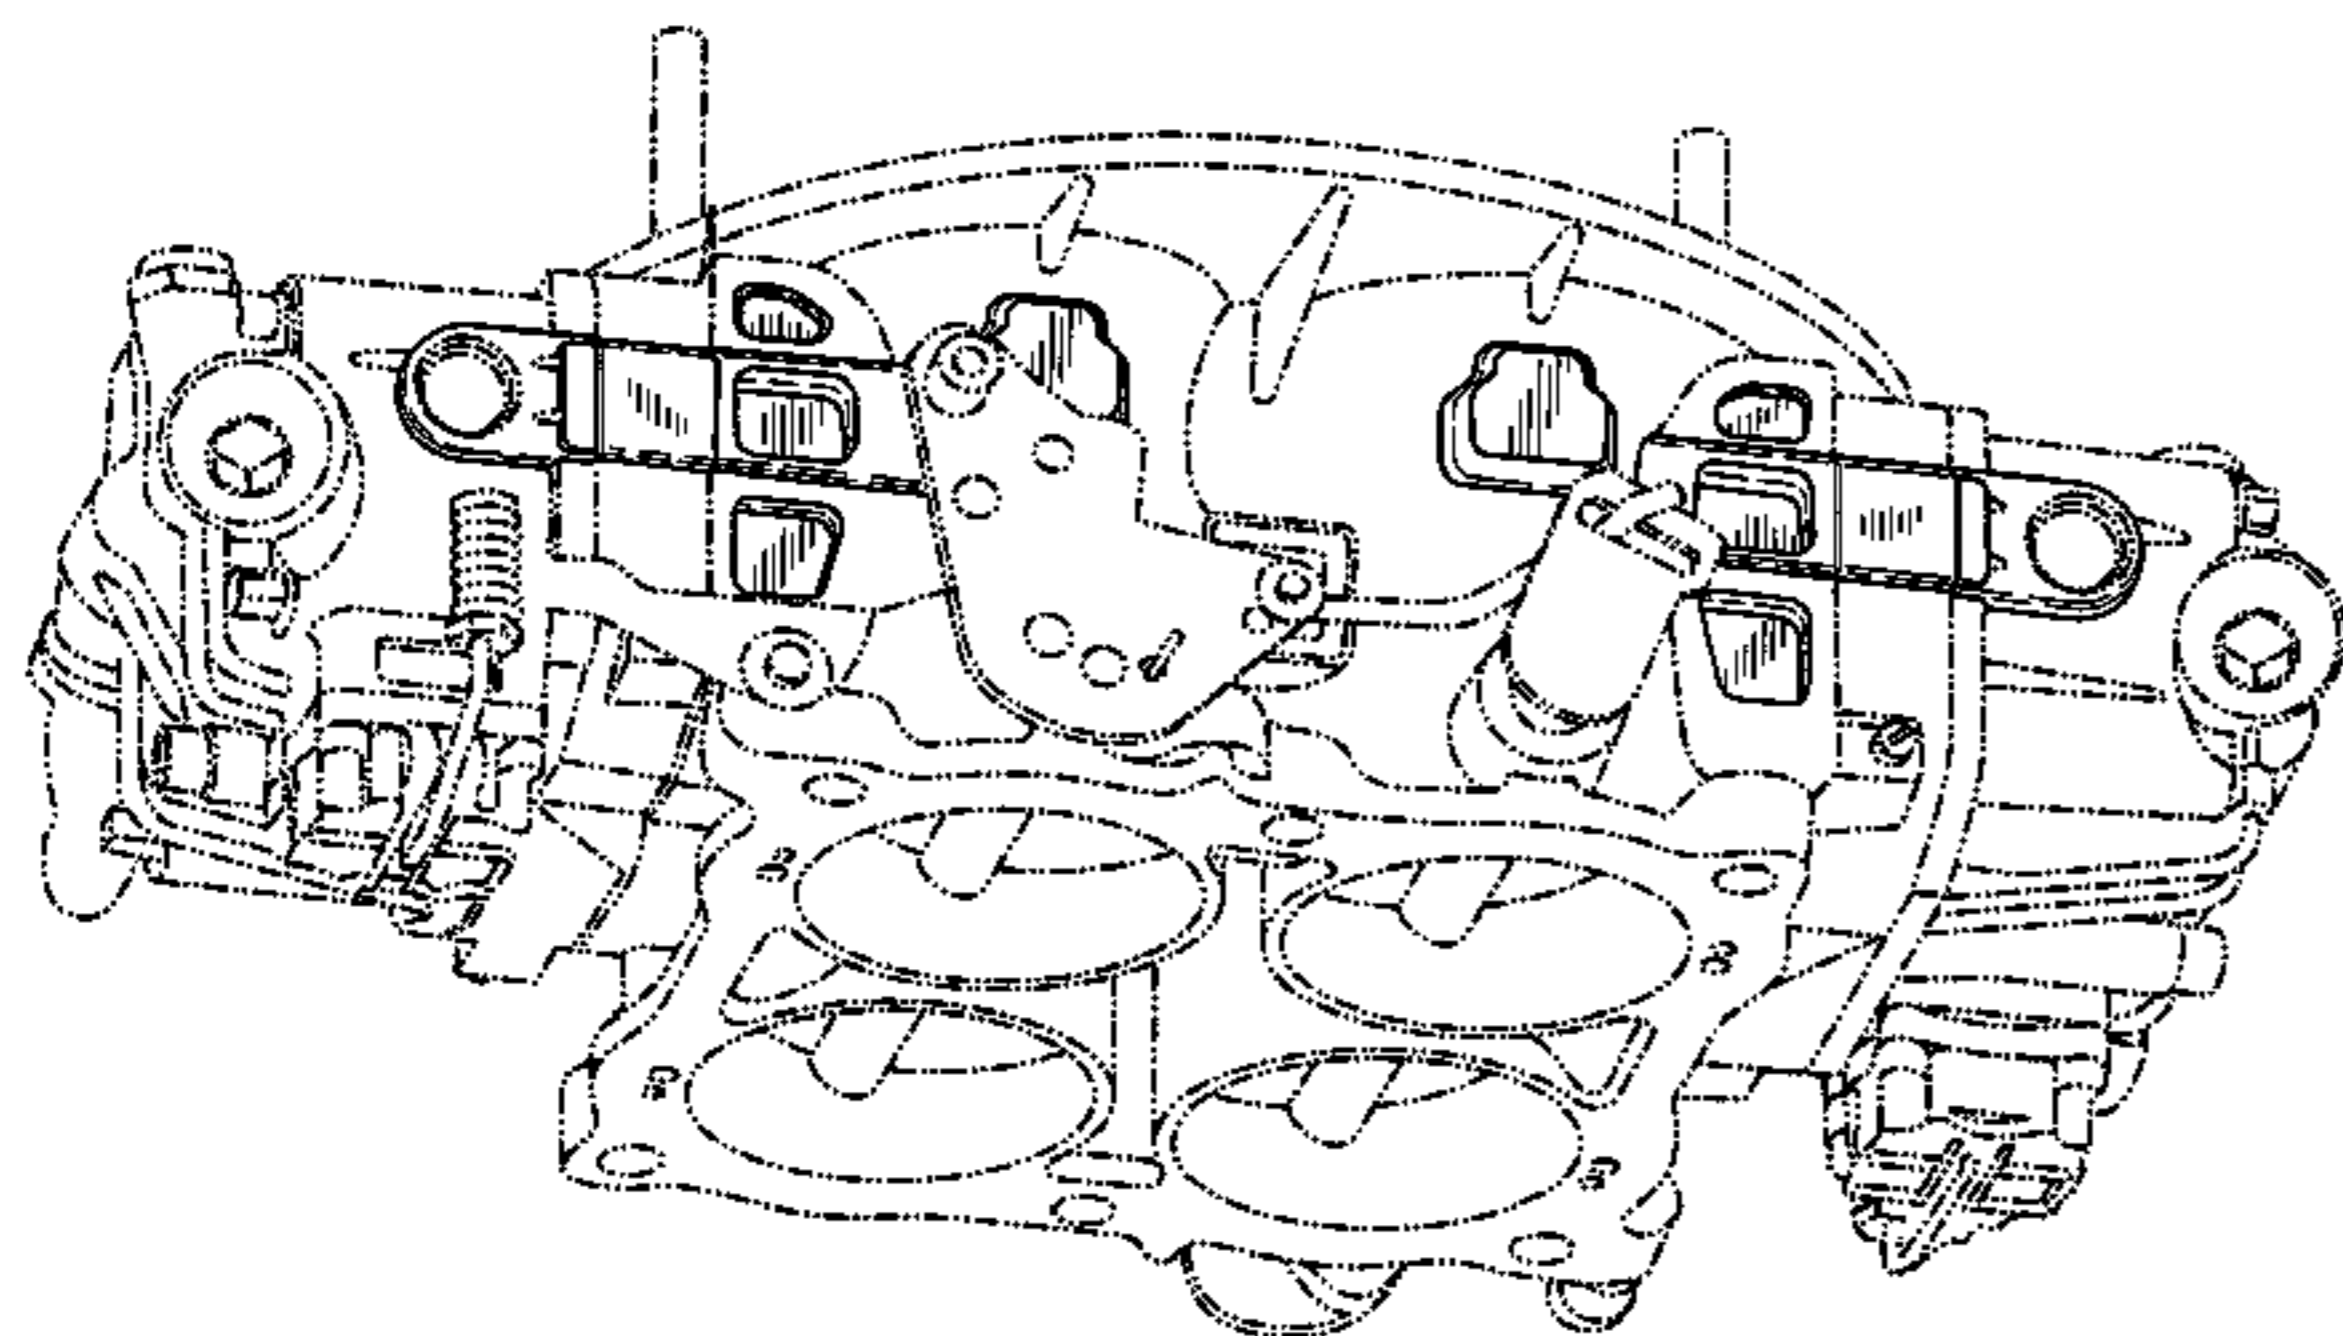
is a three-dimensional view of a four barrel carburetor showing my new design, looking upwardly at a first side thereof.
